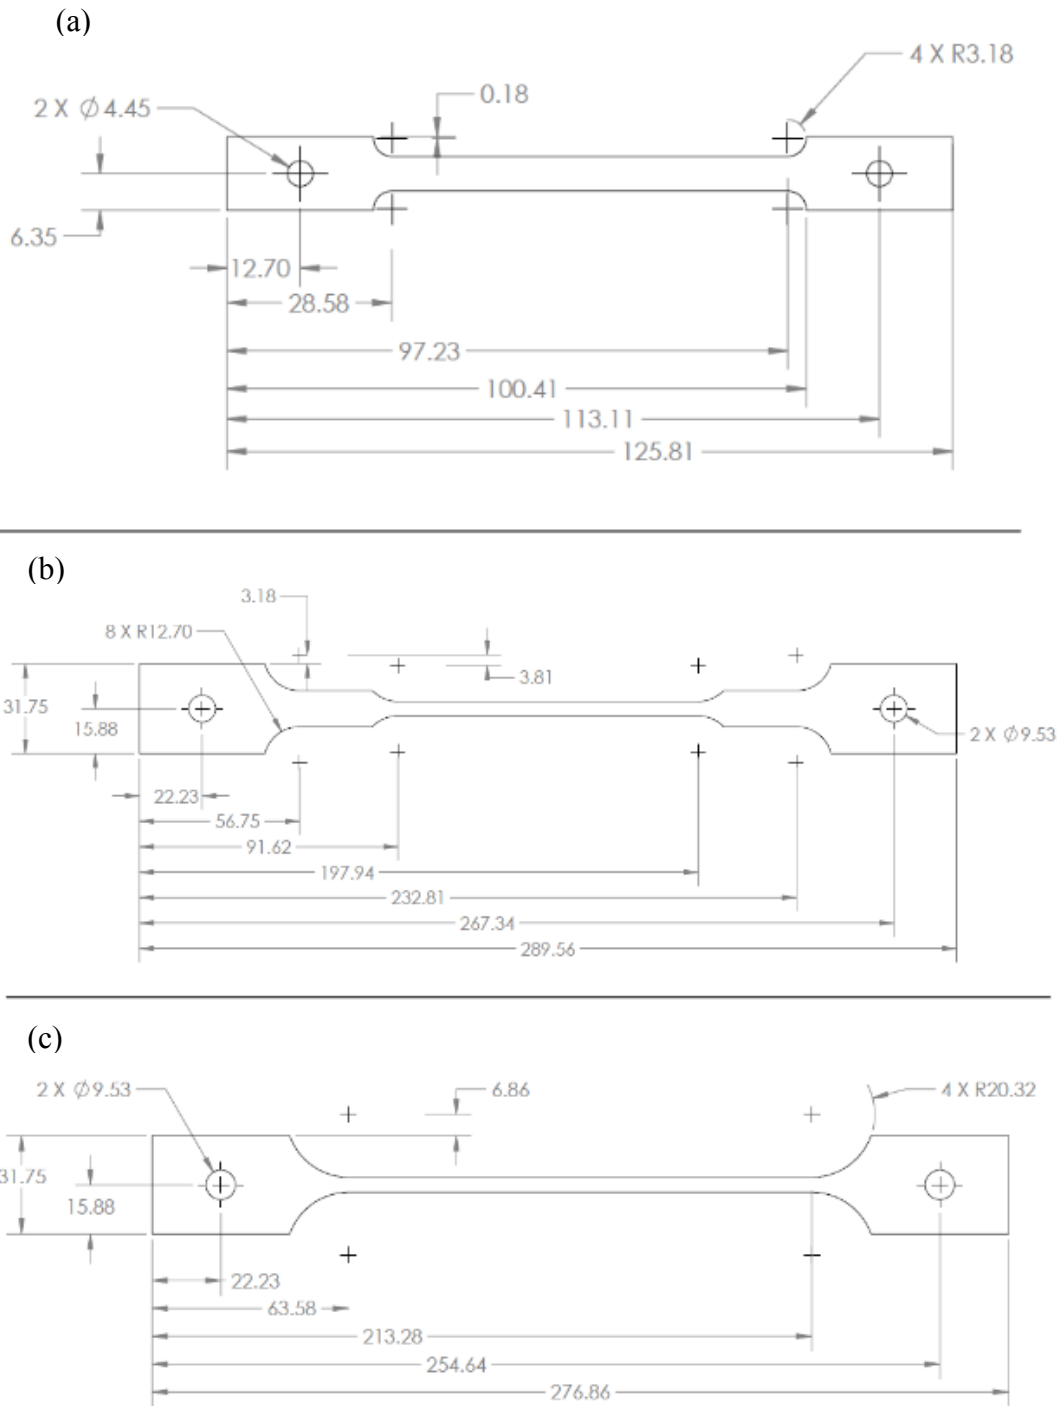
Technical drawings of (a) the room-temperature tensile coupon, (b) the rapid heating double-dog-bone tensile coupon, and (c) the single-dog-bone tensile coupon. All dimensions are in millimeters.
